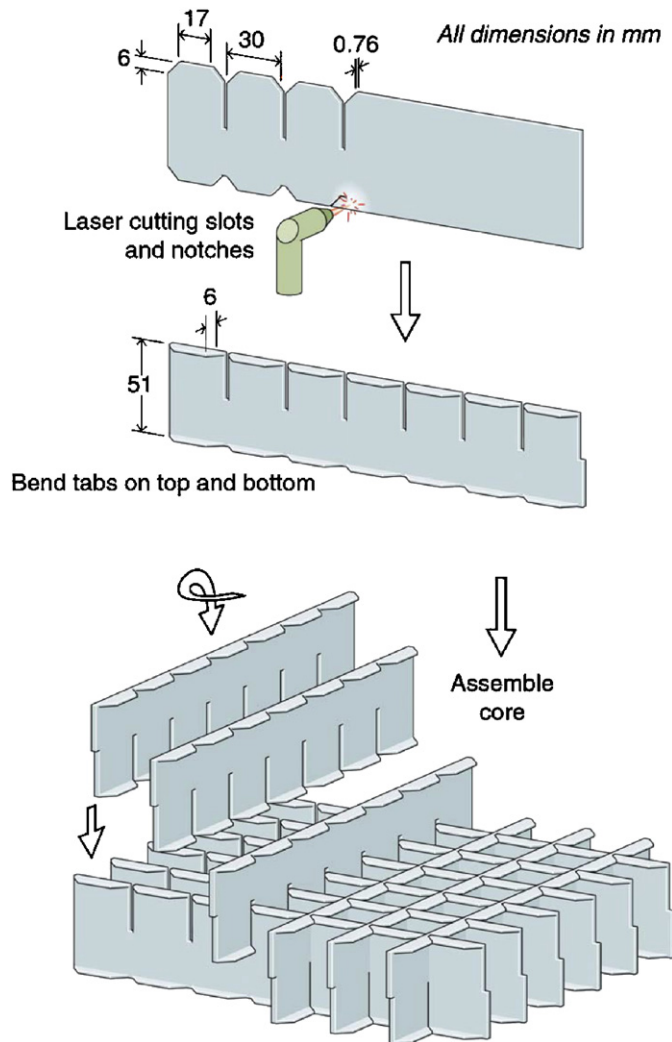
Square honeycomb core fabrication using a slotted assembly approach.
